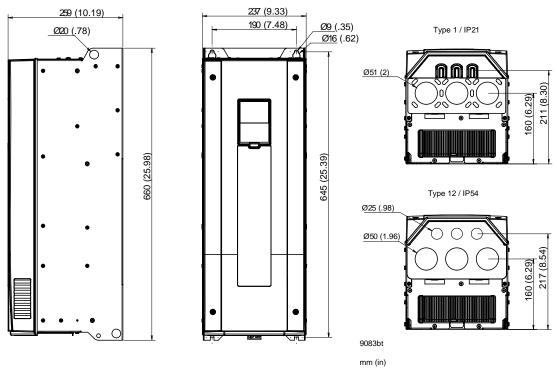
Siemens Drive Dimensions, FS7, Wall-Mount.
